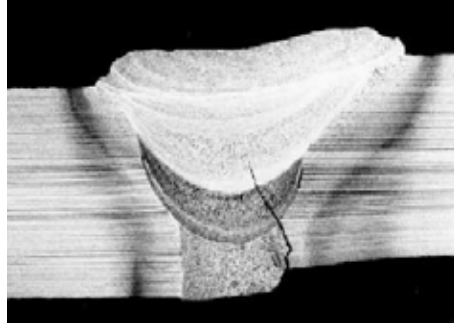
Typical example of root HAZ hydrogen crack extending into the weld metal "Reproduced Courtesy of TWI Ltd" [63].
